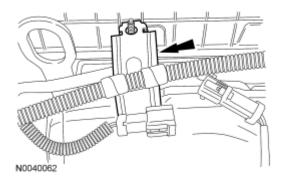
Locating Wiring Harness Bracket Courtesy of FORD MOTOR CO.
